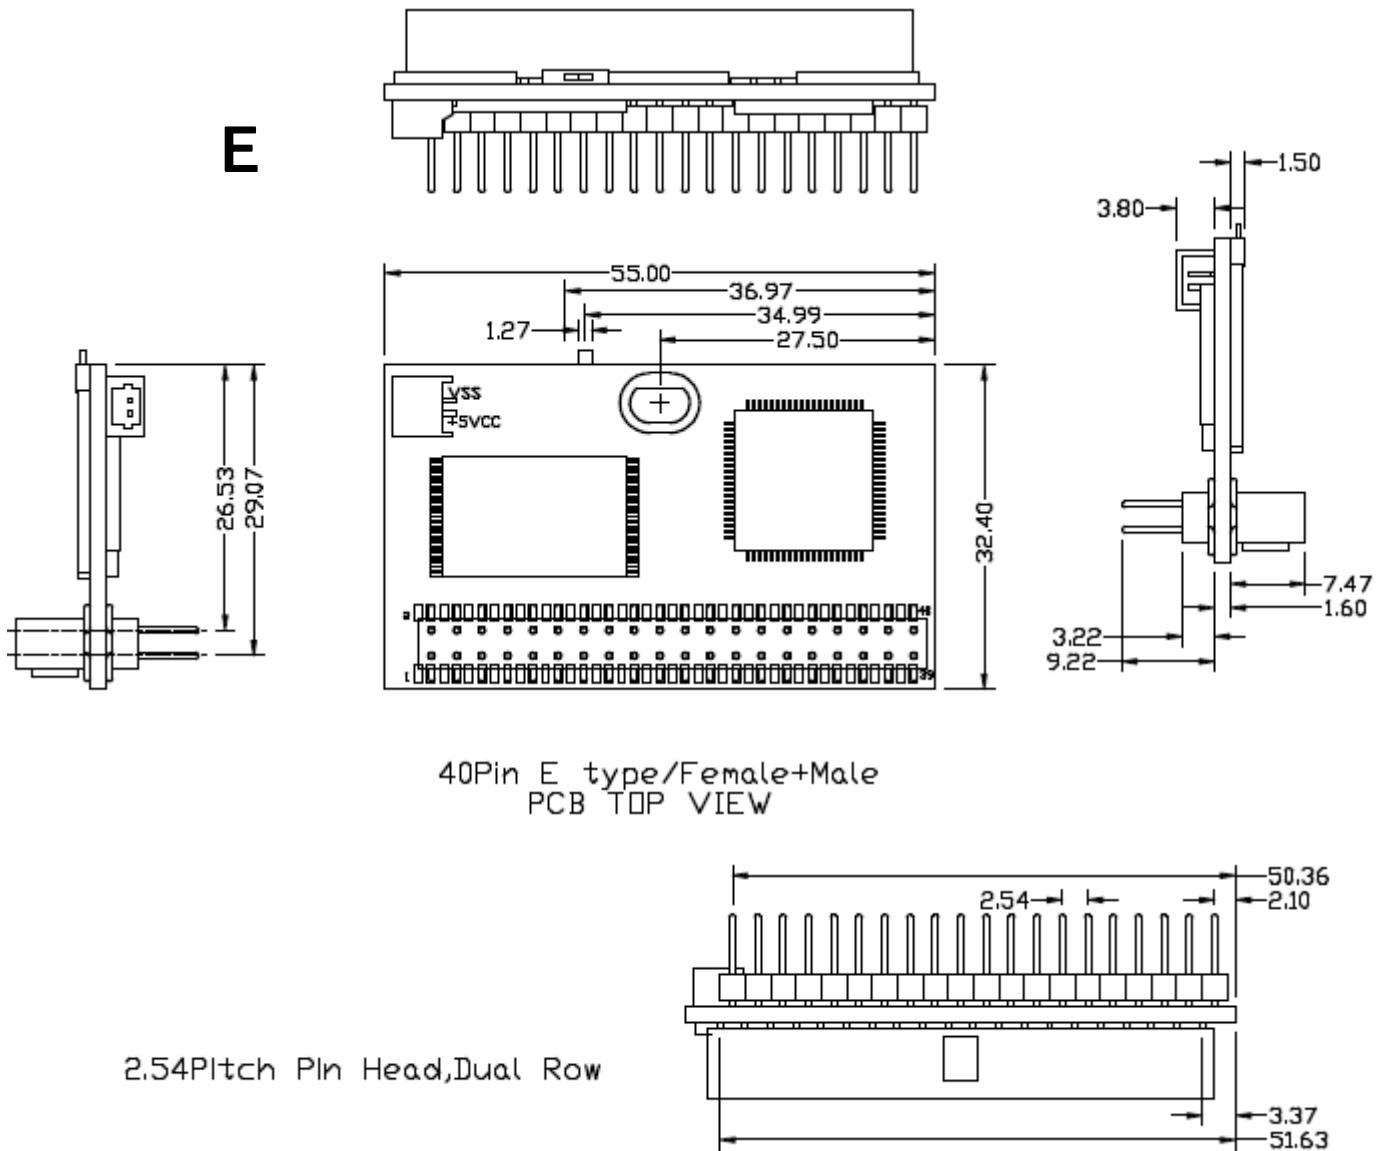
Mechanical Dimension of EDC1SE 40-pin(Horizontal Female/Male Type E)
